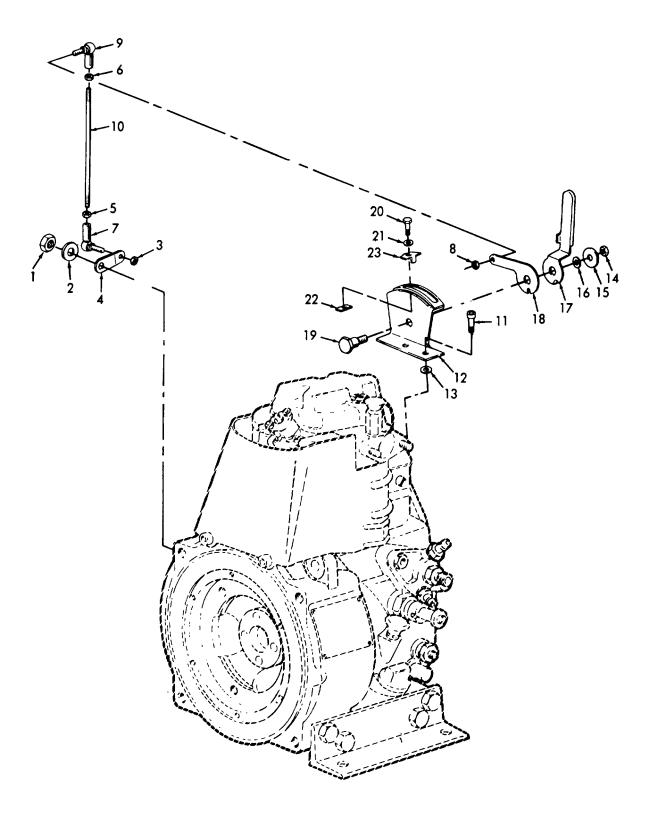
Throttle Removal/ Installation/ Adjustment.
